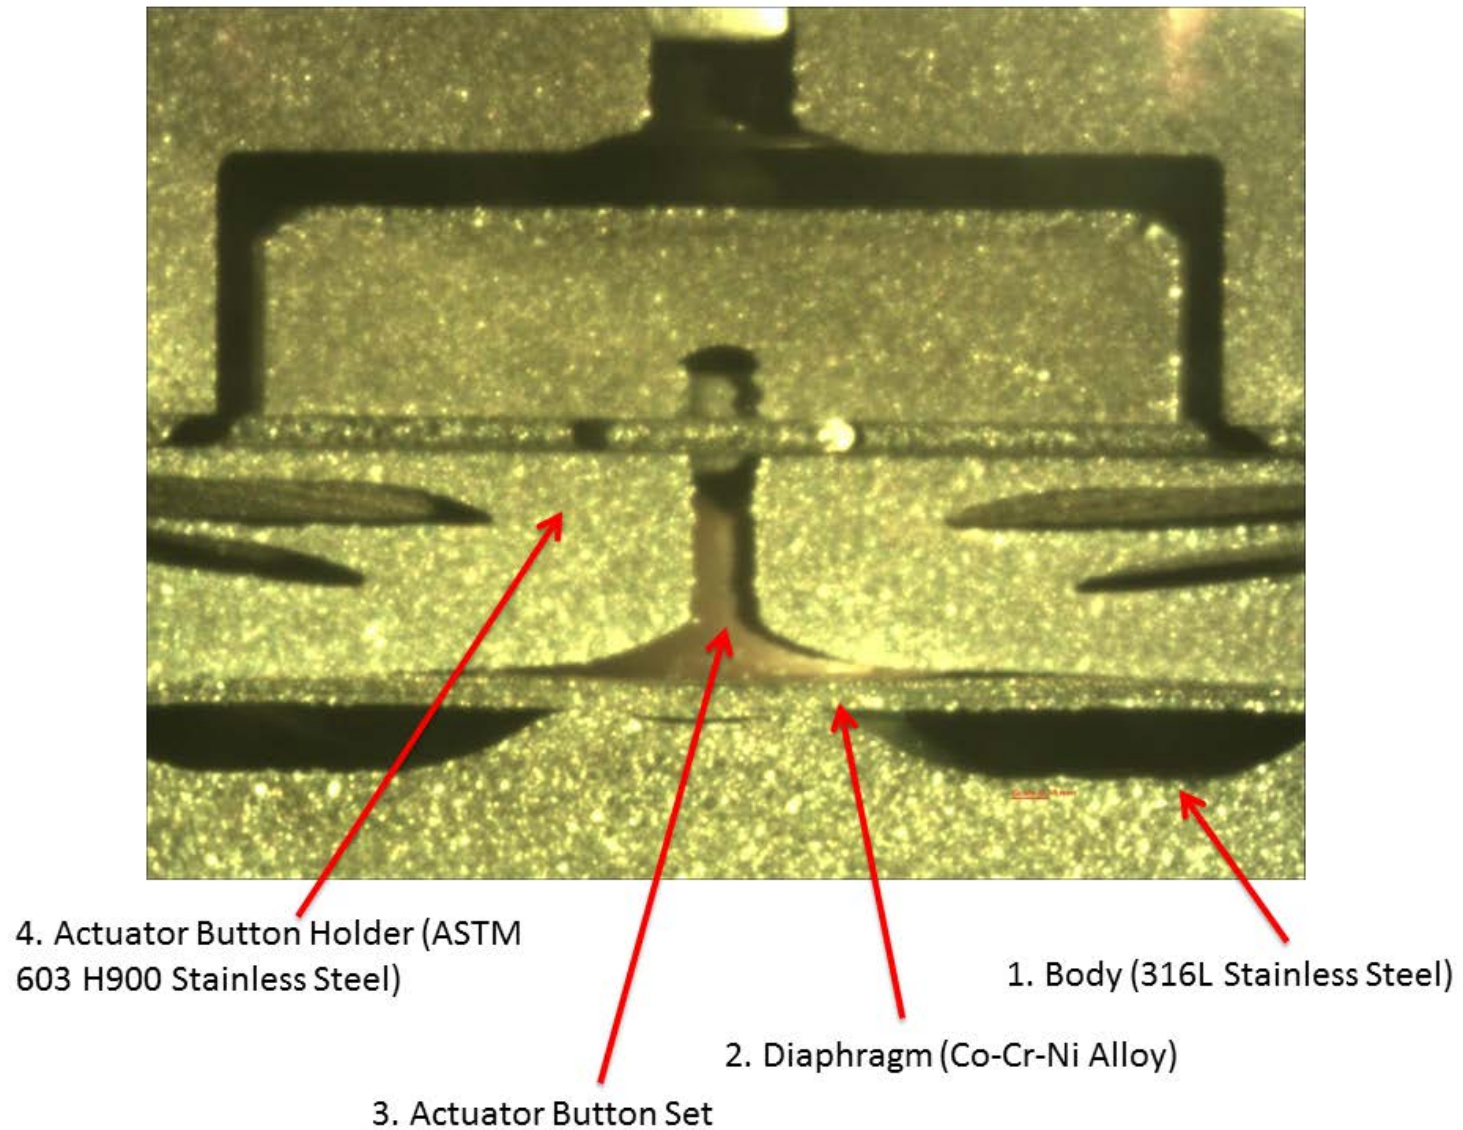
Optical Microscope view of cross section of the valve body, labeled for components and materials
